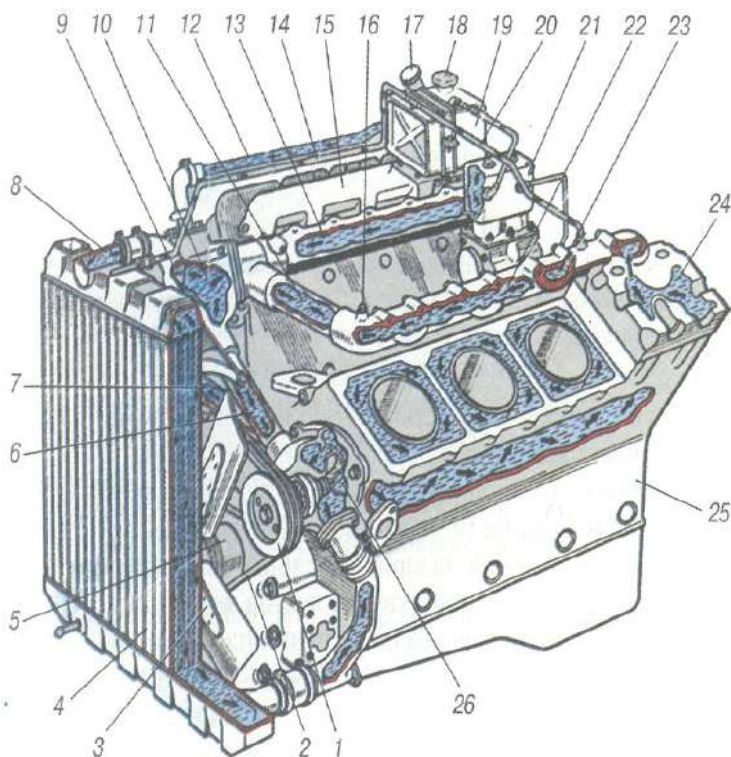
Diagram of the KamAZ-740 engine cooling system:
